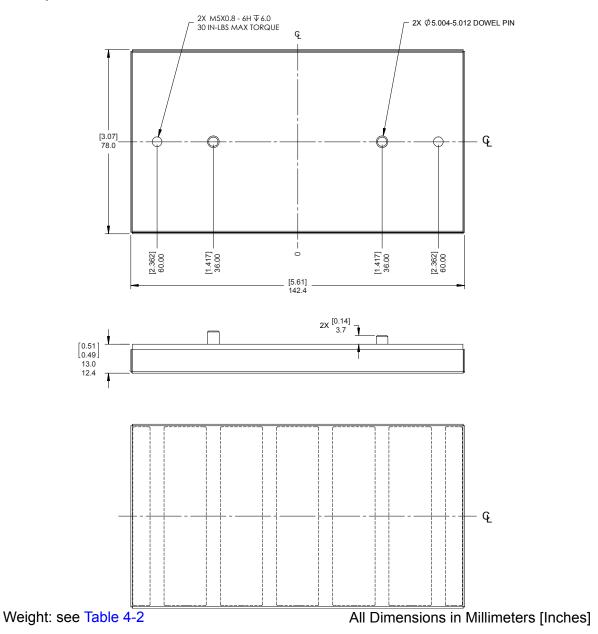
Standard 'F' Covered Magnet Array Mechanical Drawing
